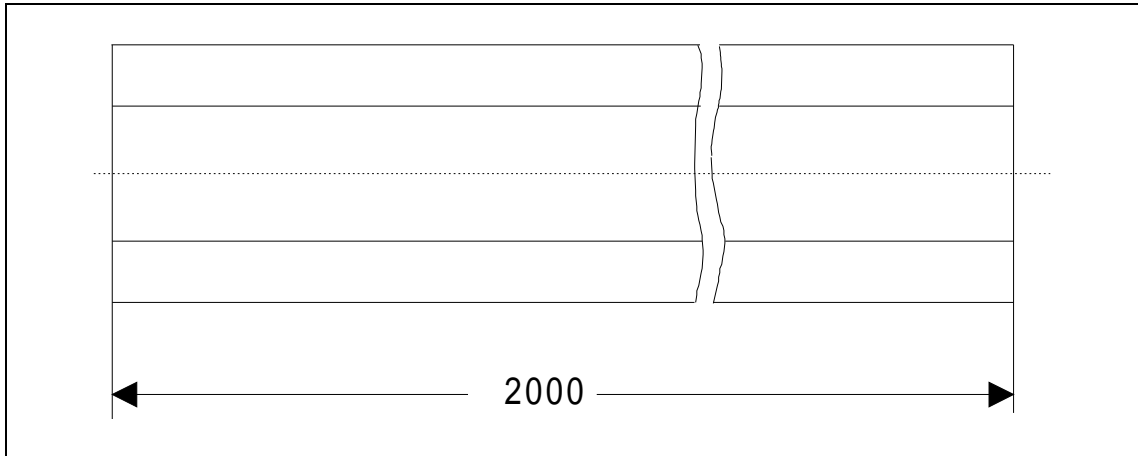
Dimension Drawing of the 2 m Standard Sectional Rail
